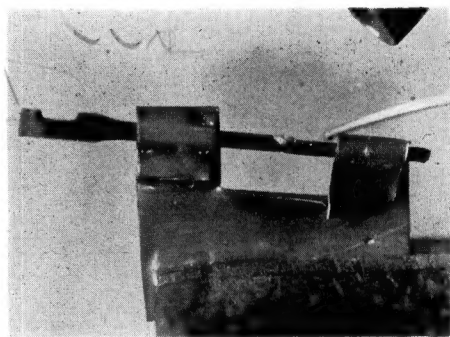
Here is a jig or holder made to hold a firing pin while it is being silver soldered. If properly done, silver soldered joints are as strong as the original piece.
